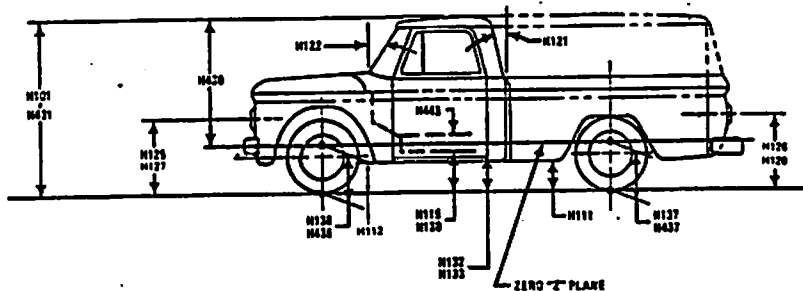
EXTERIOR DIMENSIONS, HEIGHT—TRUCK
